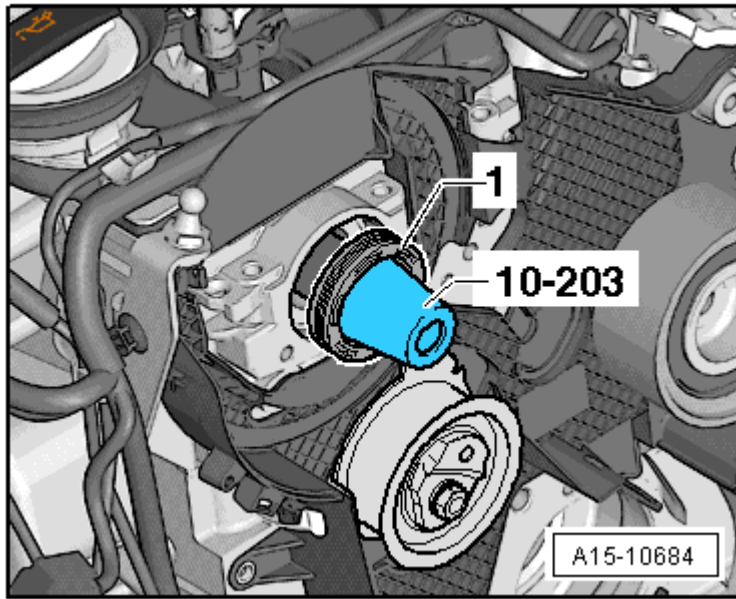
Identifying Seal -1- Pressed In To Stop Using Seal Driver 10-203
